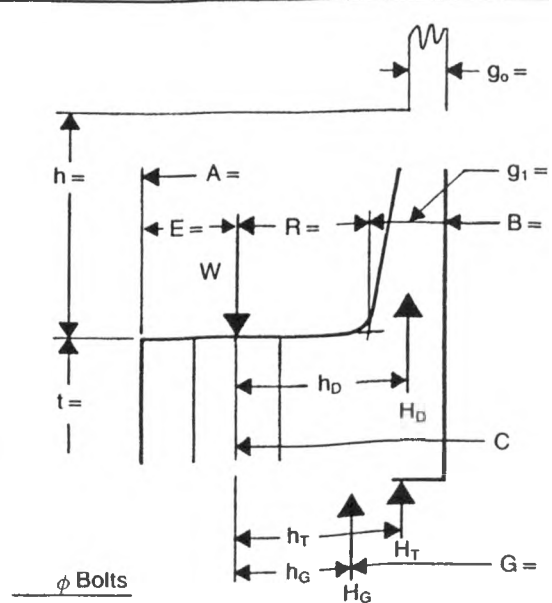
Dimensional data and forces for a weld neck flange (integral).
